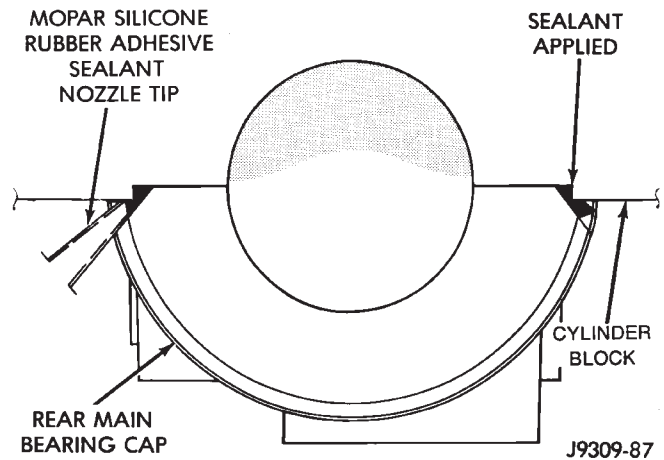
Apply Sealant to Bearing Cap to Block Joint OIL PUMP
